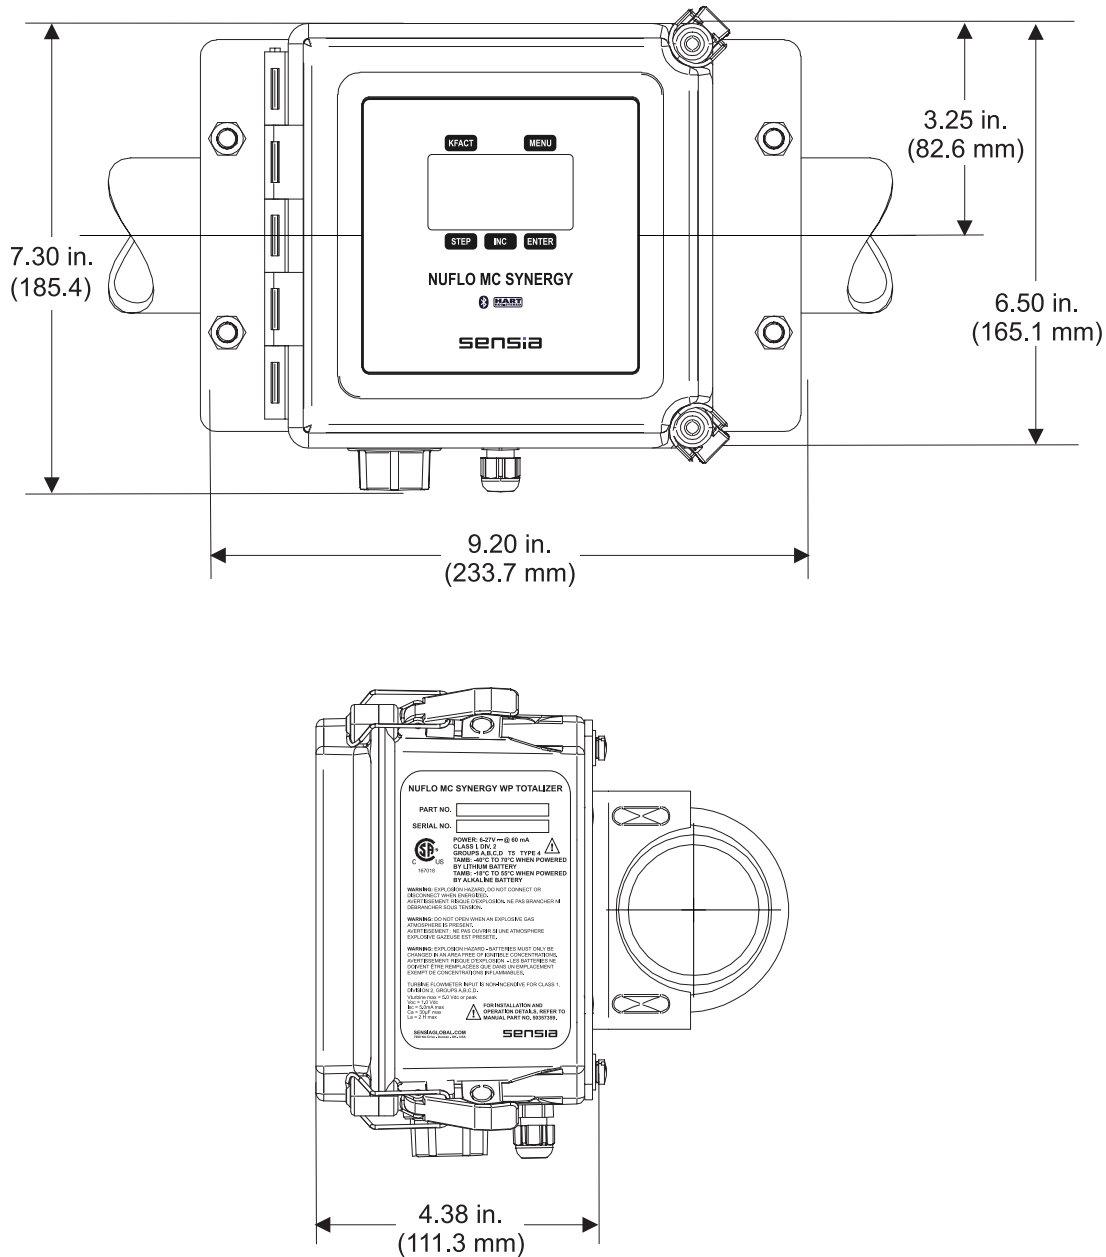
Typical mount dimensions in inches (millimeters) for remote-mount installation on horizontal pipe
